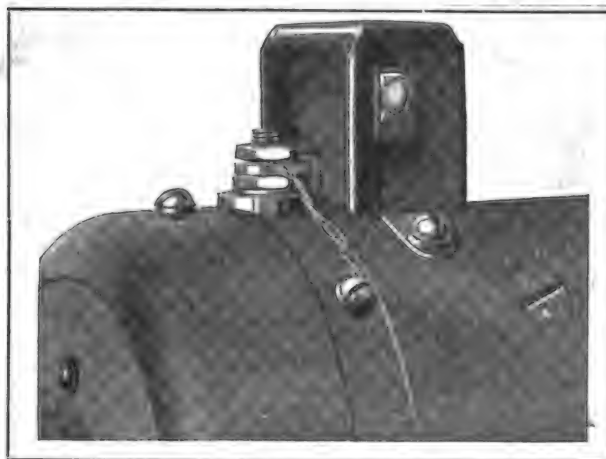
, Grounding Cut-Out by Short-Circuiting, Preventing Damage to Generator.
